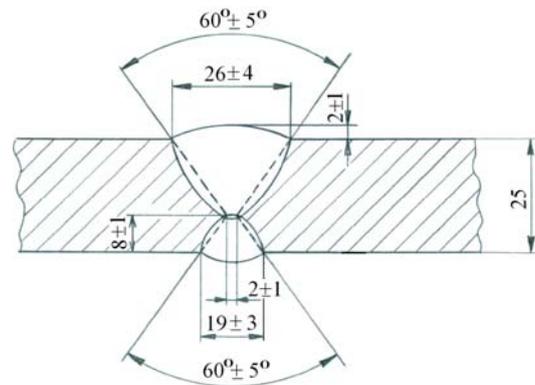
The admissible errors for a butane spherical tanks butt weld.
